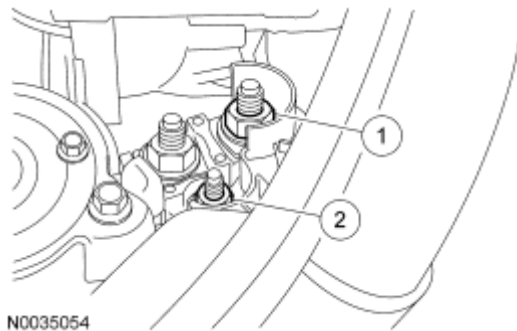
Identifying Battery Cable & Starter Solenoid Terminal Nut
